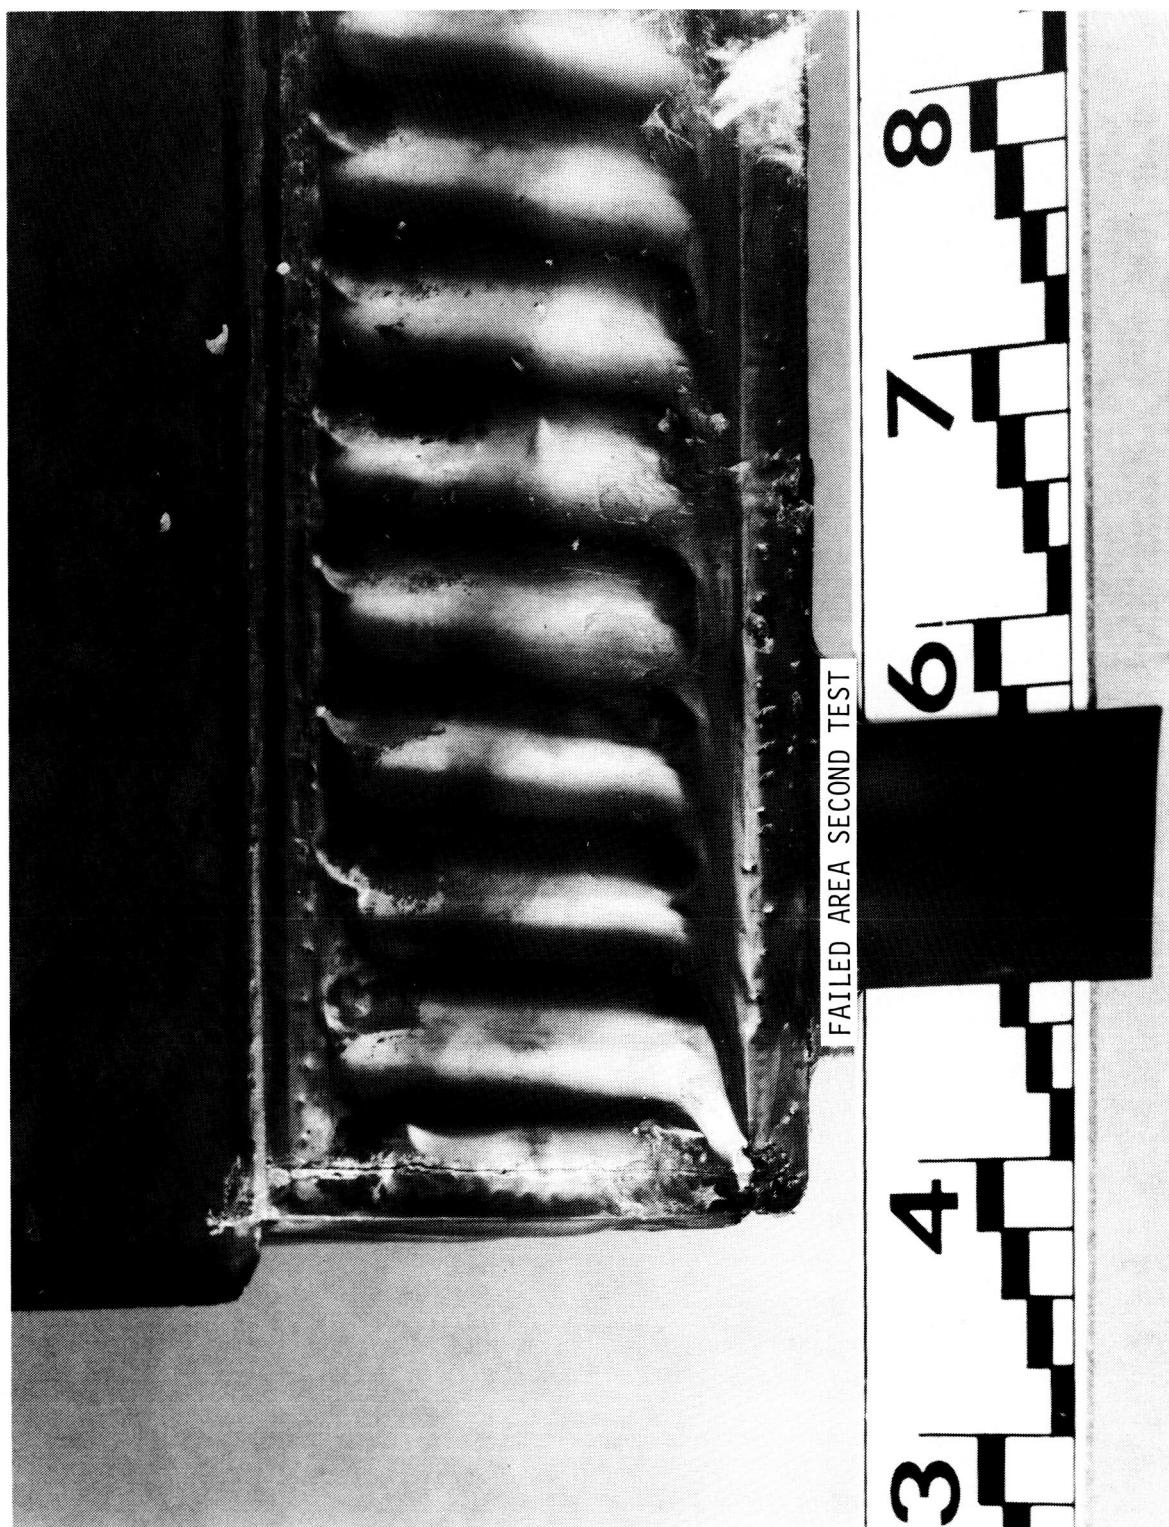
Panel Failed at 3.6 psi in the INCONEL 617 Material at the Bi-Metallic Joints During the Second Test, View 1
